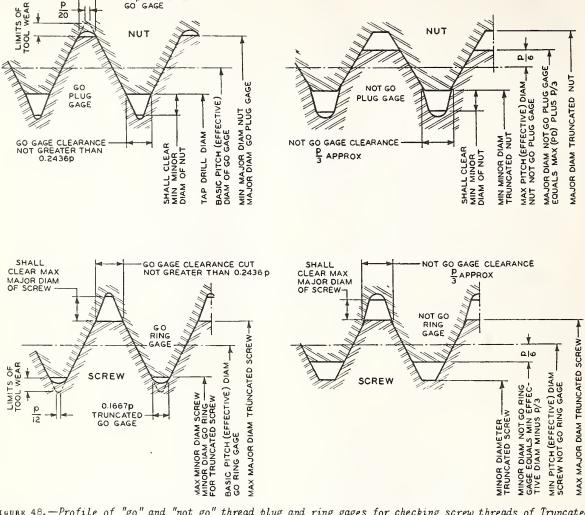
Profile of "go" and "not go" thread plug and ring gages for checking screw threads of Truncated Whitworth form.
